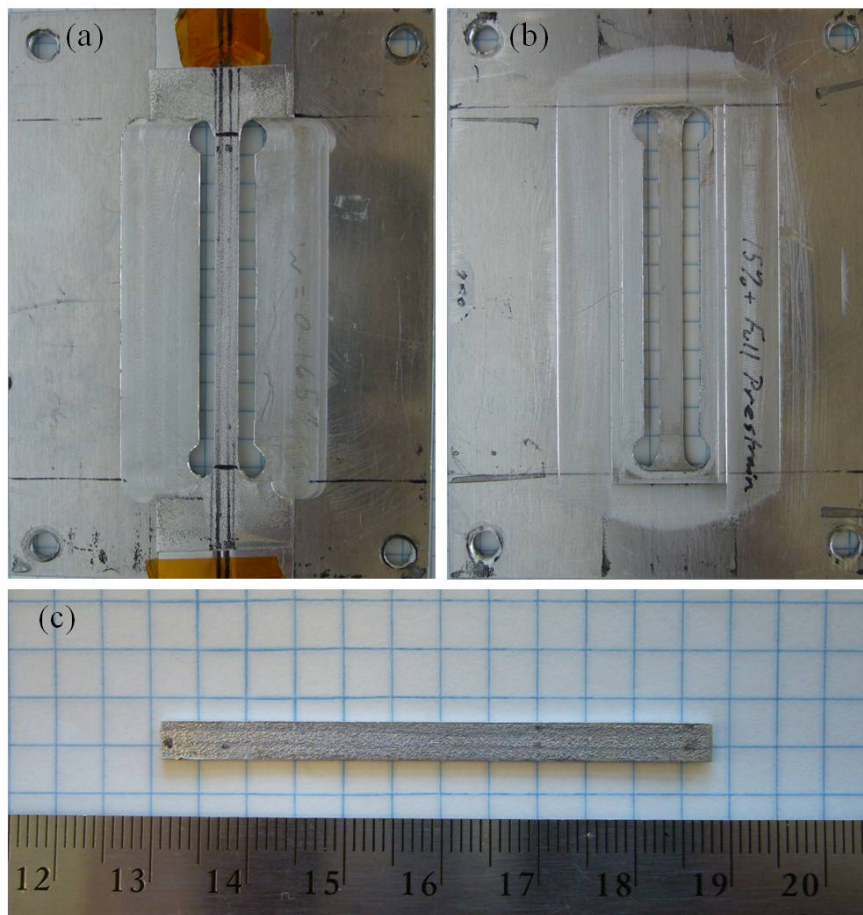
NiTi-Al composite 4 after final machining process used to remove the Al build plate: (a) top and (b) bottom. (c) Final geometry of composite 4.
